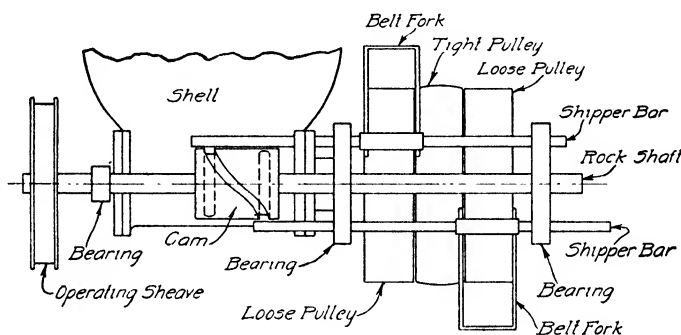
Details of Cylindrical-Cam Belt Shipper Shown in Fig 41
